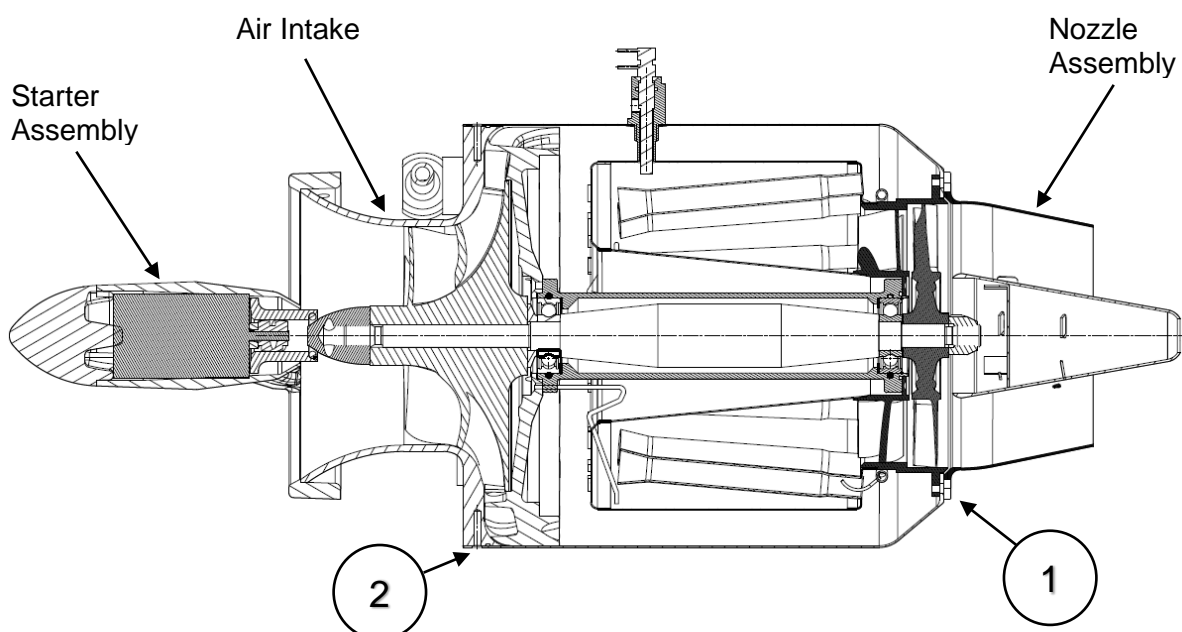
Jet Engine Assembly; Front cover not depicted
